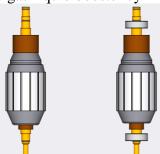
motor rotor parts (left) and motor rotor after bearing press fitting (right)
